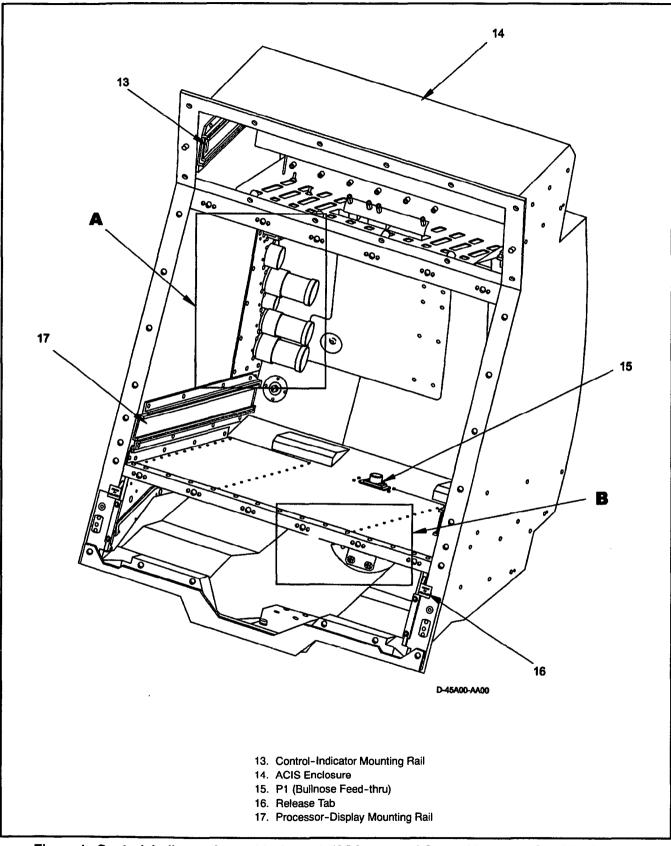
Control-Indicator Assembly C-12514/ASQ-225 and Control Indicator Set AN/ASQ-225 Components (Sheet 3)
